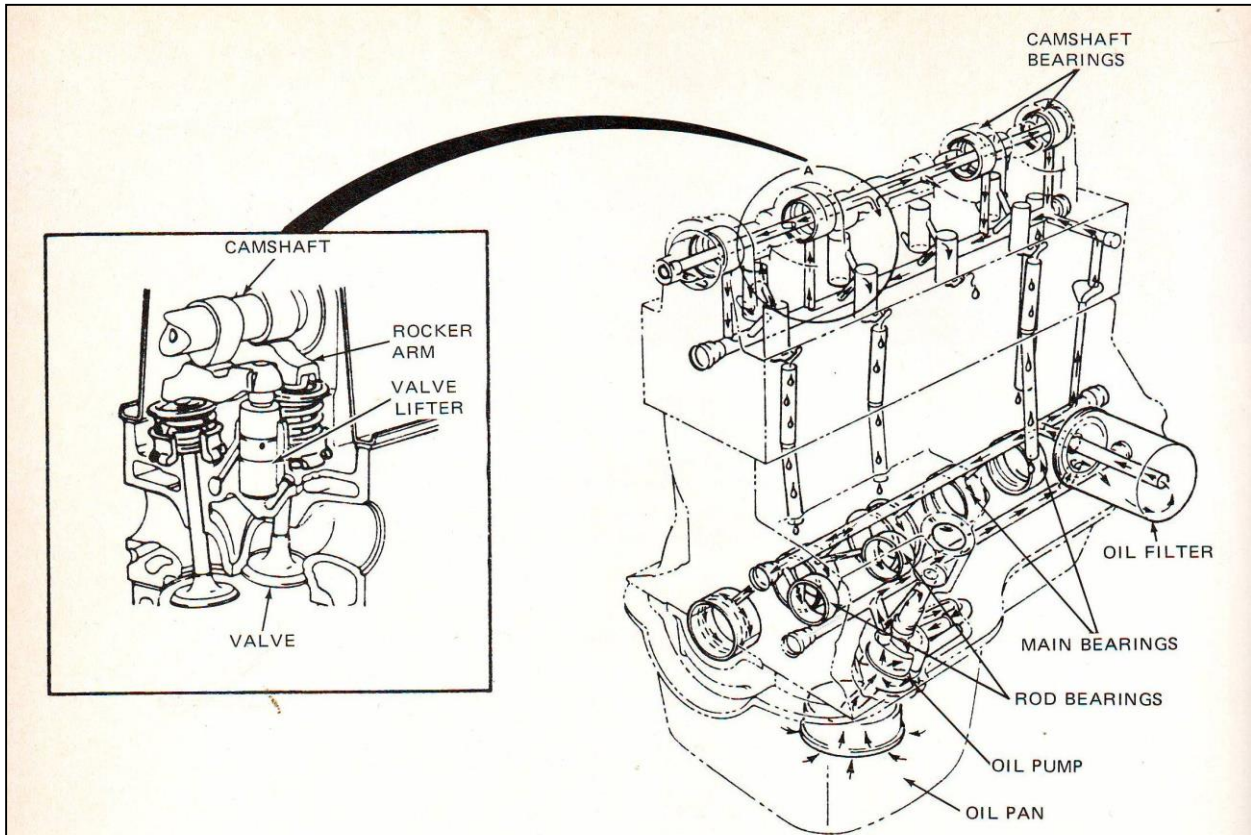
Lubricating system for a four-cylinder OHC spark-ignition engine. The insert to the left shows details of the valve train. (Ford Motor Company)
